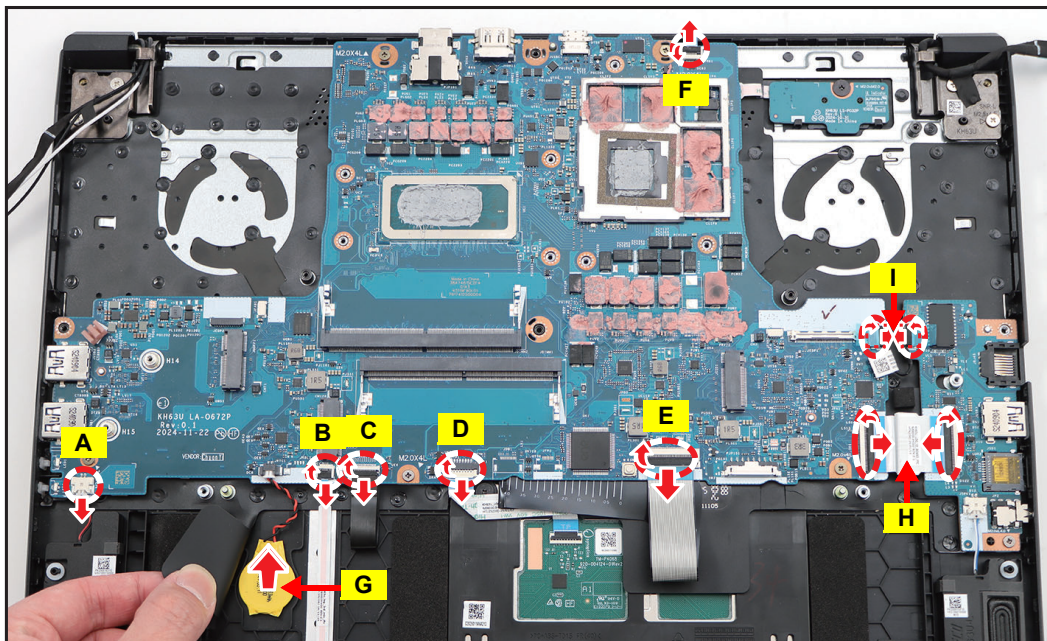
Disconnecting the Cables and Removing the RTC Battery
